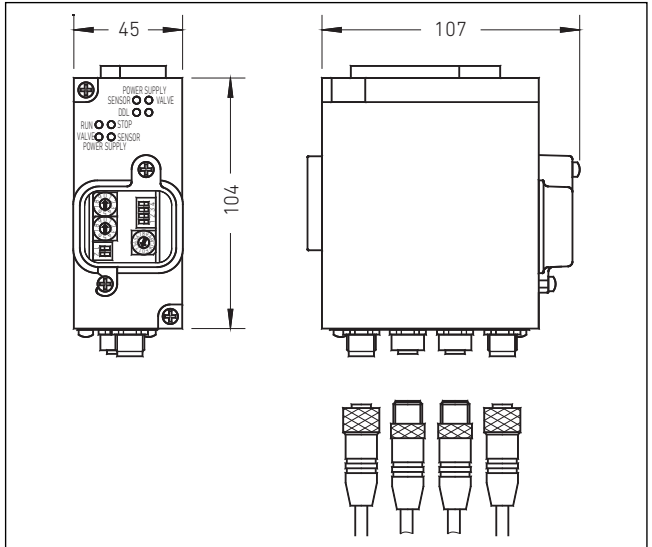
Dimensions of the bus coupler with drivers (337 500 026 0)
